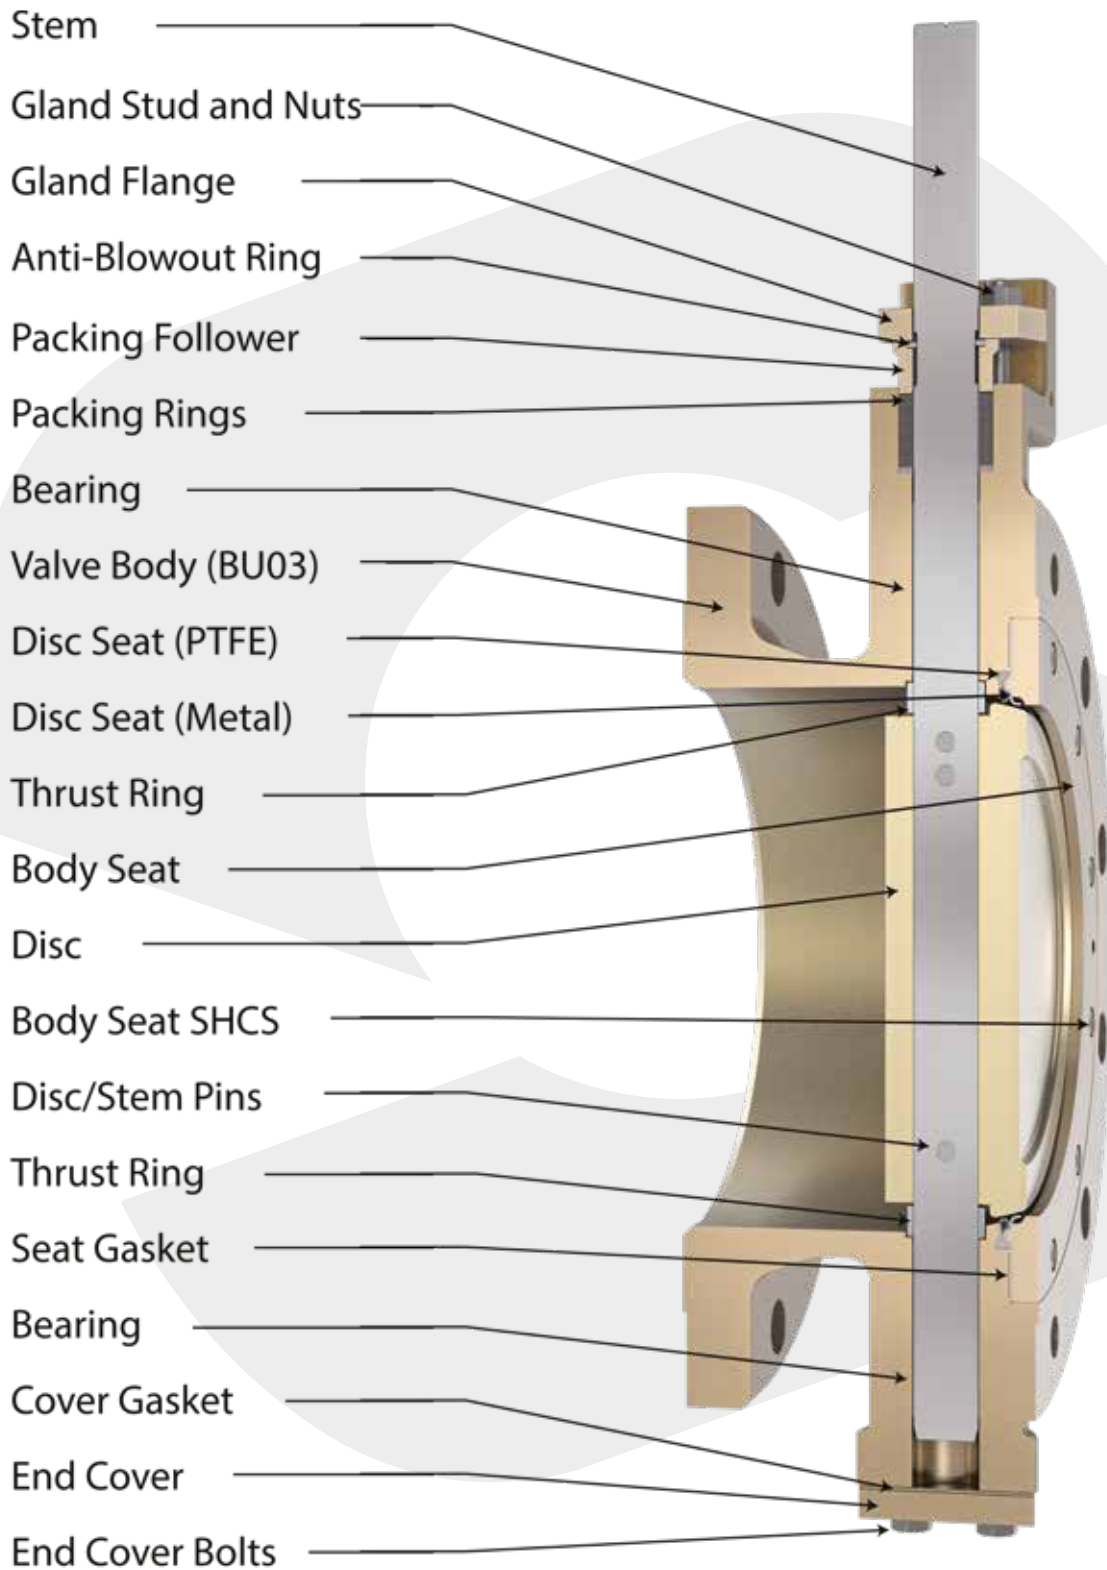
Sectional view of double-offset double-flanged flat-face (BU03)
